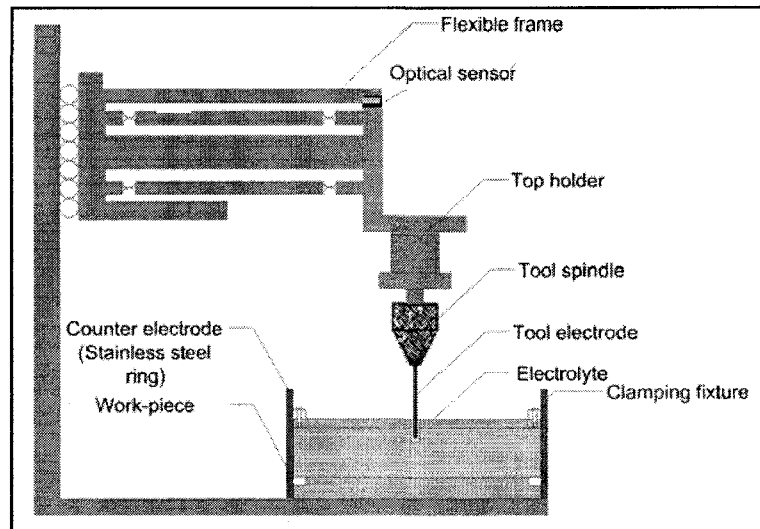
Schematic for the initial setup of SACE gravity-feed drilling [4]. The constant force refers to the weight of the drilling head (flexible frame, Top holder and tool spindle with the electrode).
